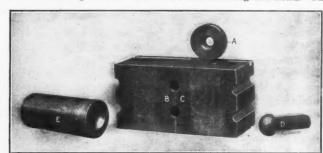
Type of Dies and Tools used in Bolt and Rivet Making Machine shown in Fig. 26
